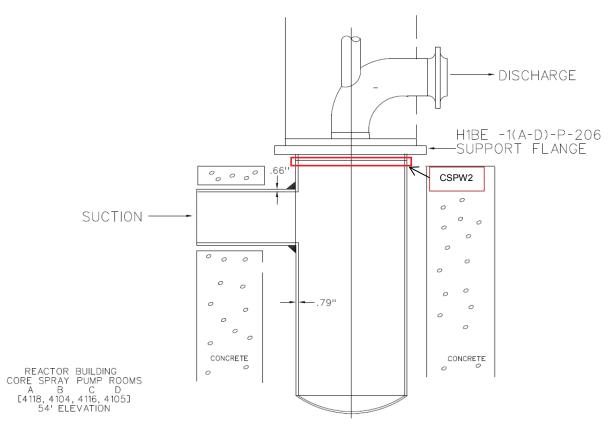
Weld 1-CP-206-CSP-W2 (Extracted from Reference DWG B-2)
